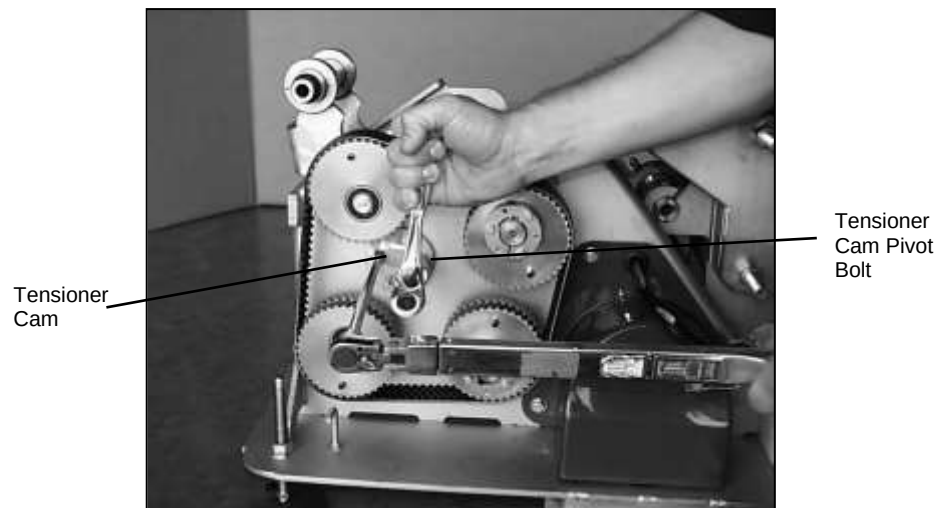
Tightening the Tensioner Cam and Tensioner Cam Pivot Bolt
